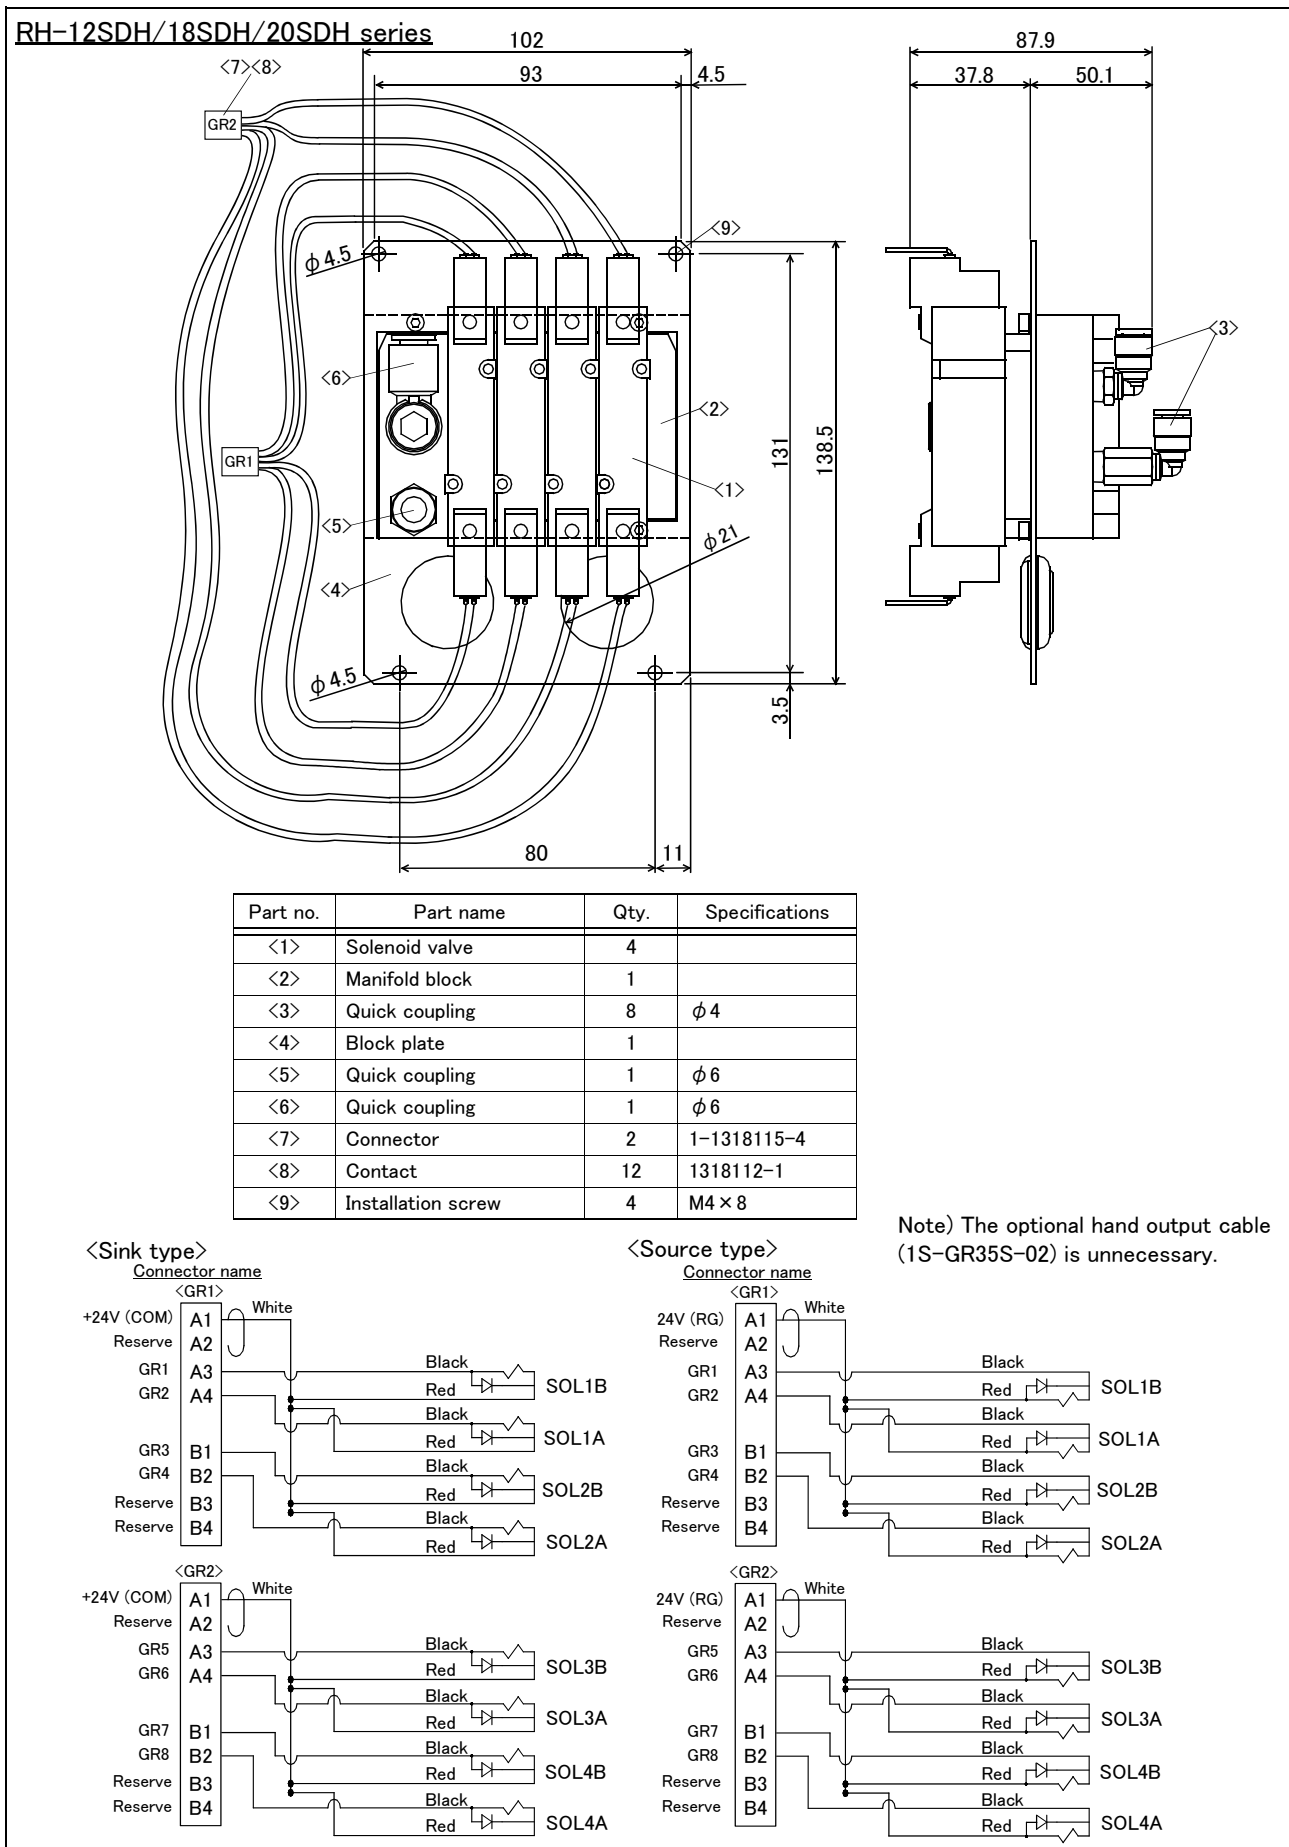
Outline dimensional drawing (RH-12SDH/RH-18SDH/RH-20SDH series)
